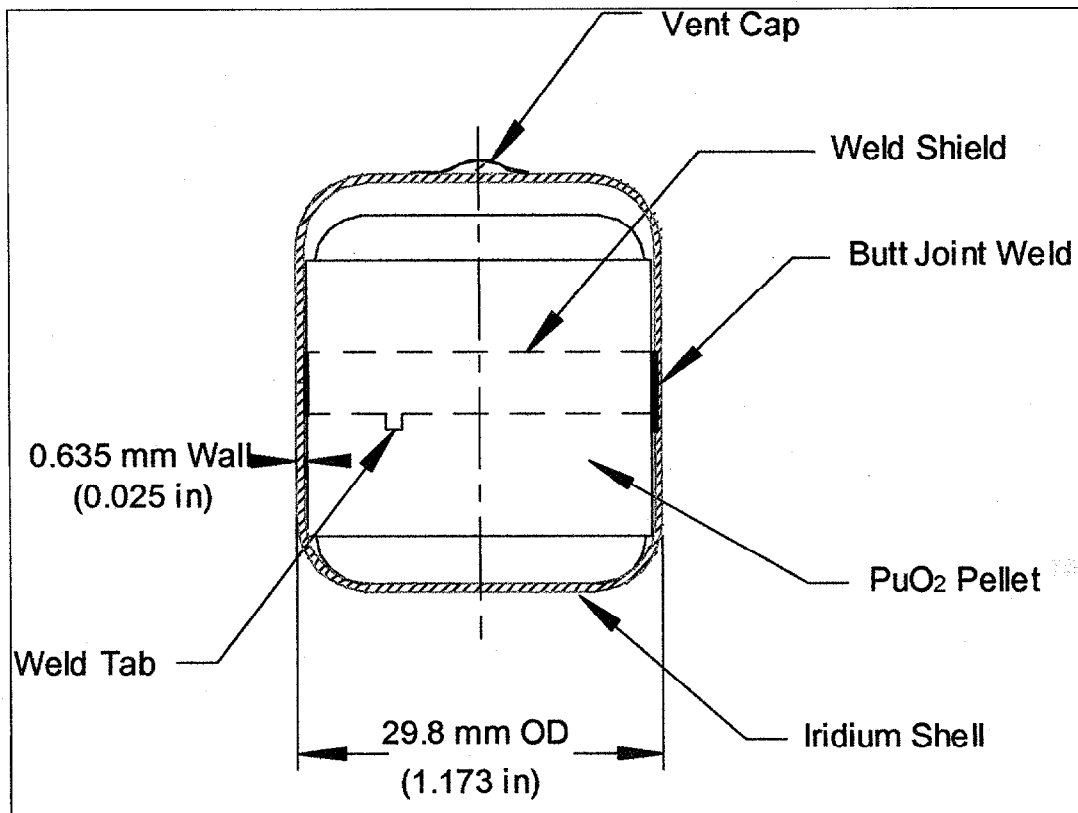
Galileo/Cassini GPHS Iridium Fueled Clad Assembly
